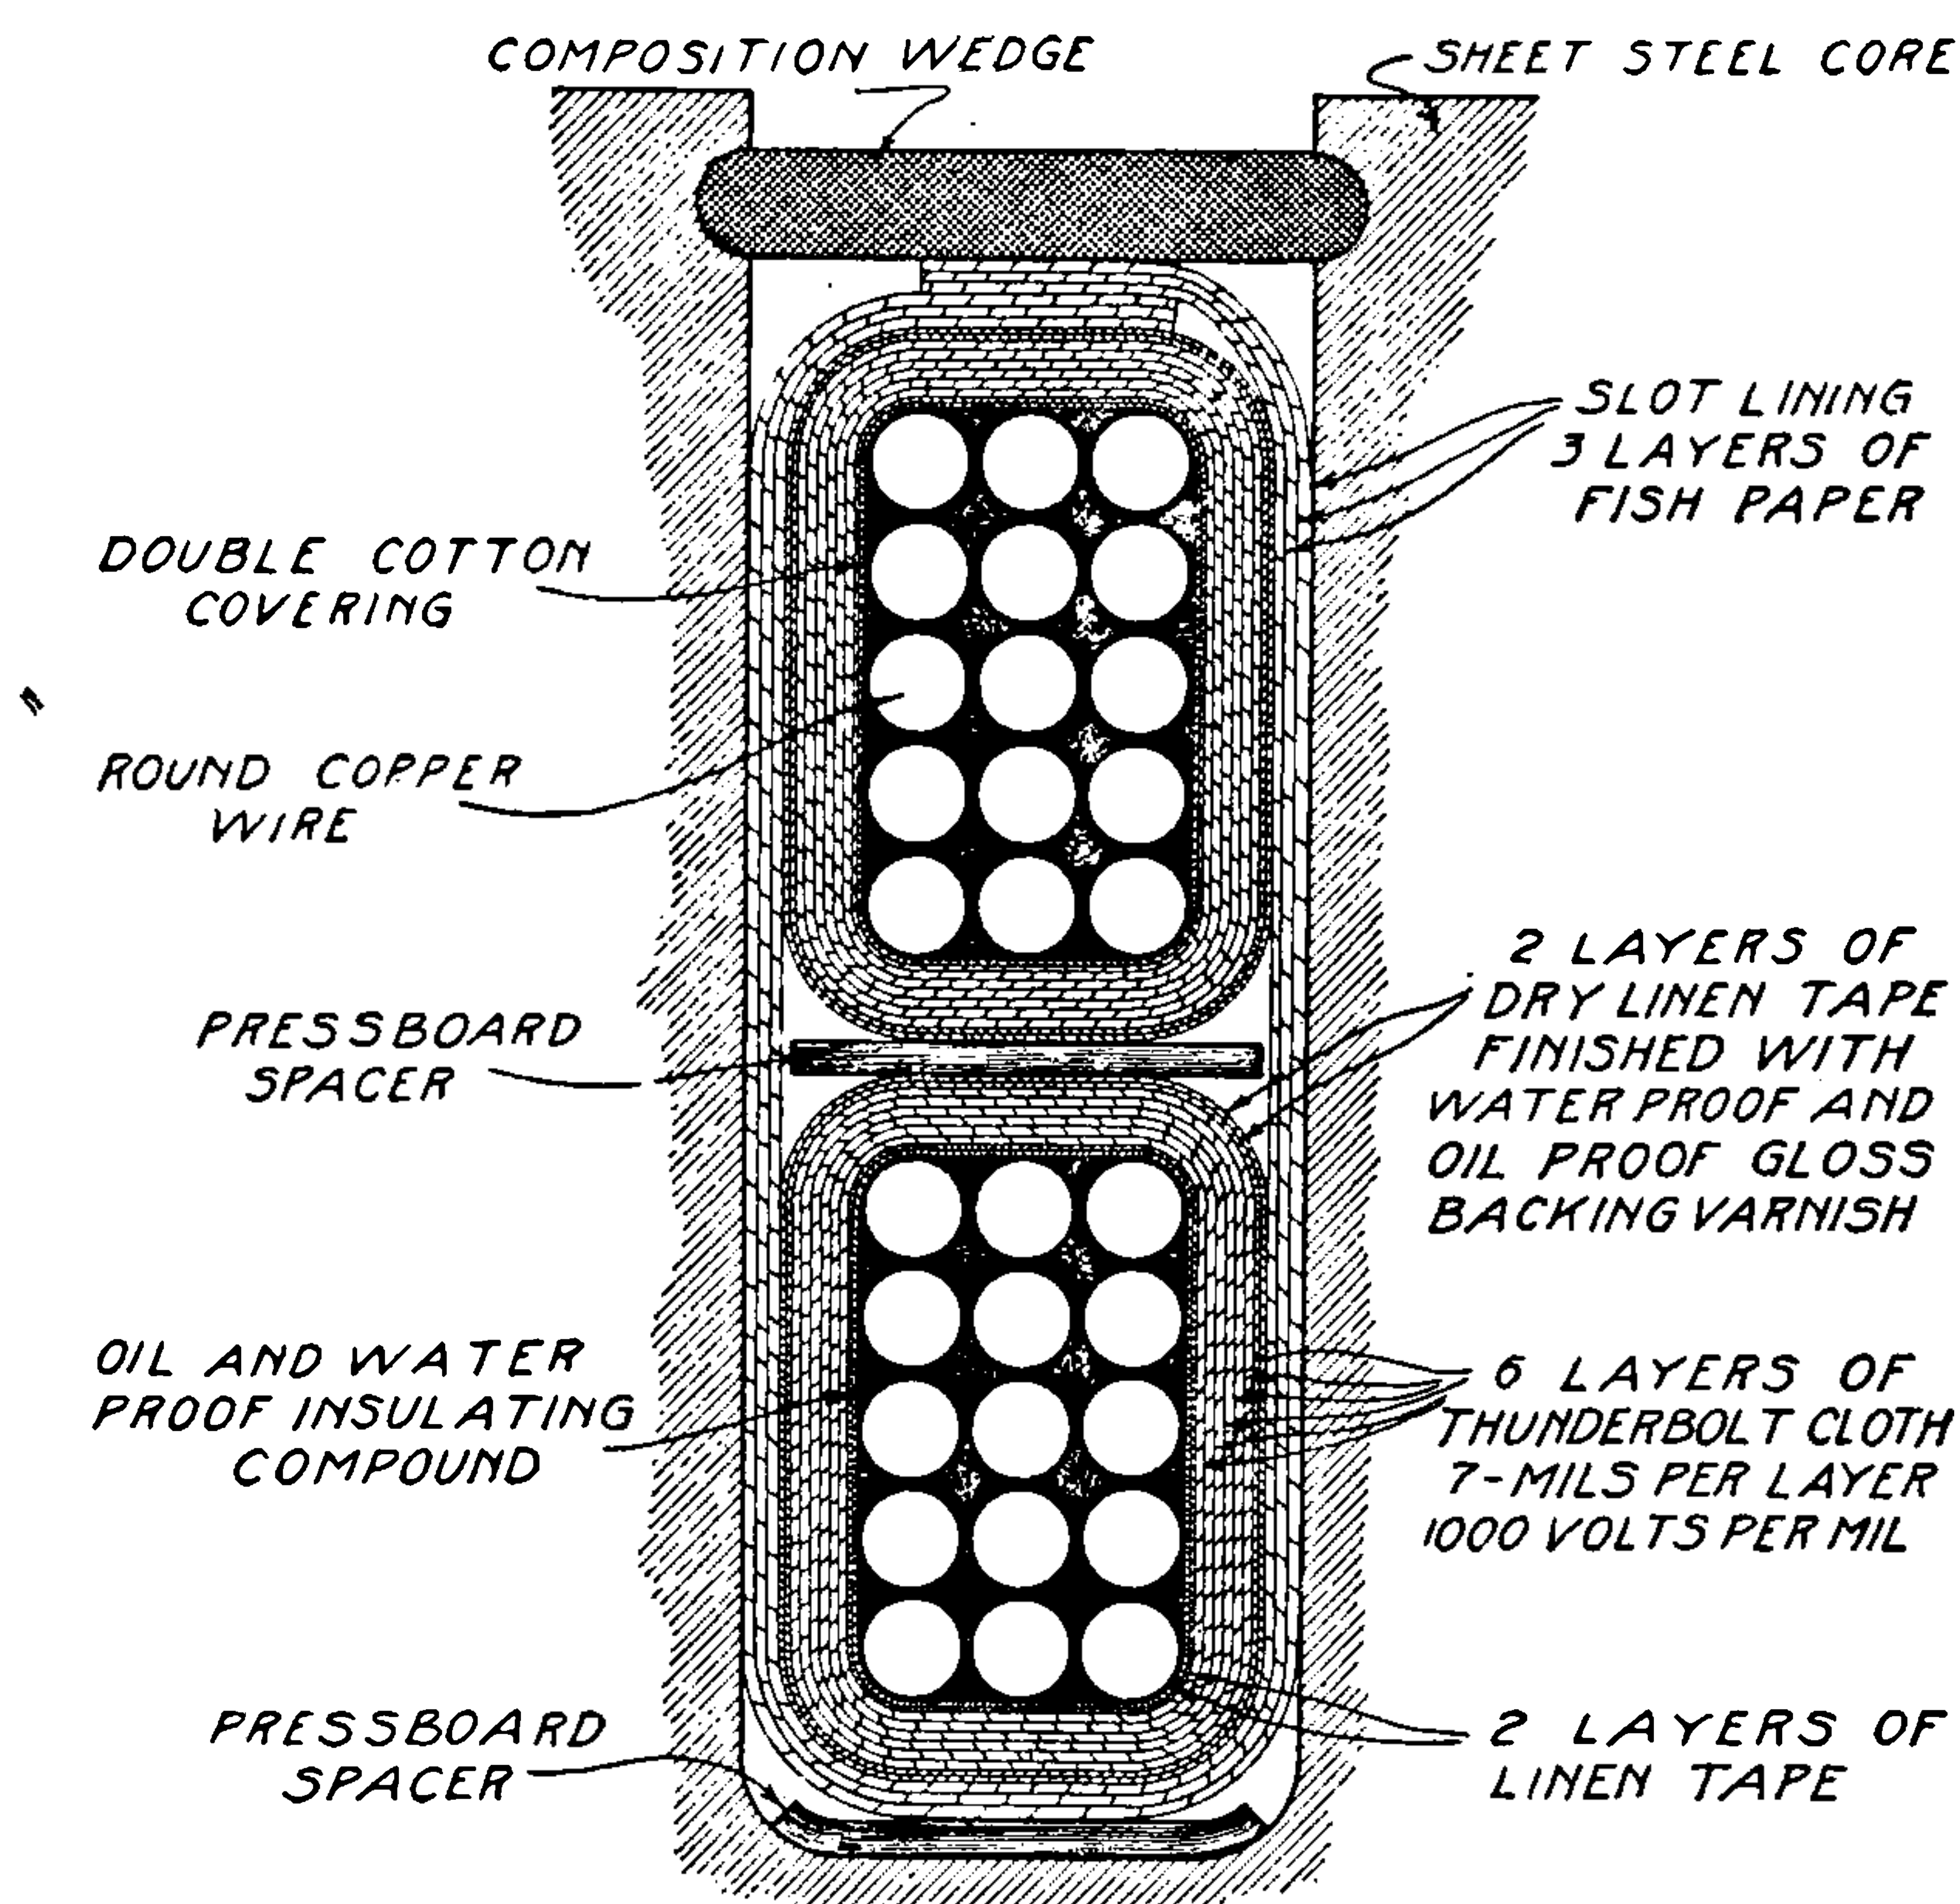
Details of Electric Machinery Company Armature Coil and Slot Insulation
